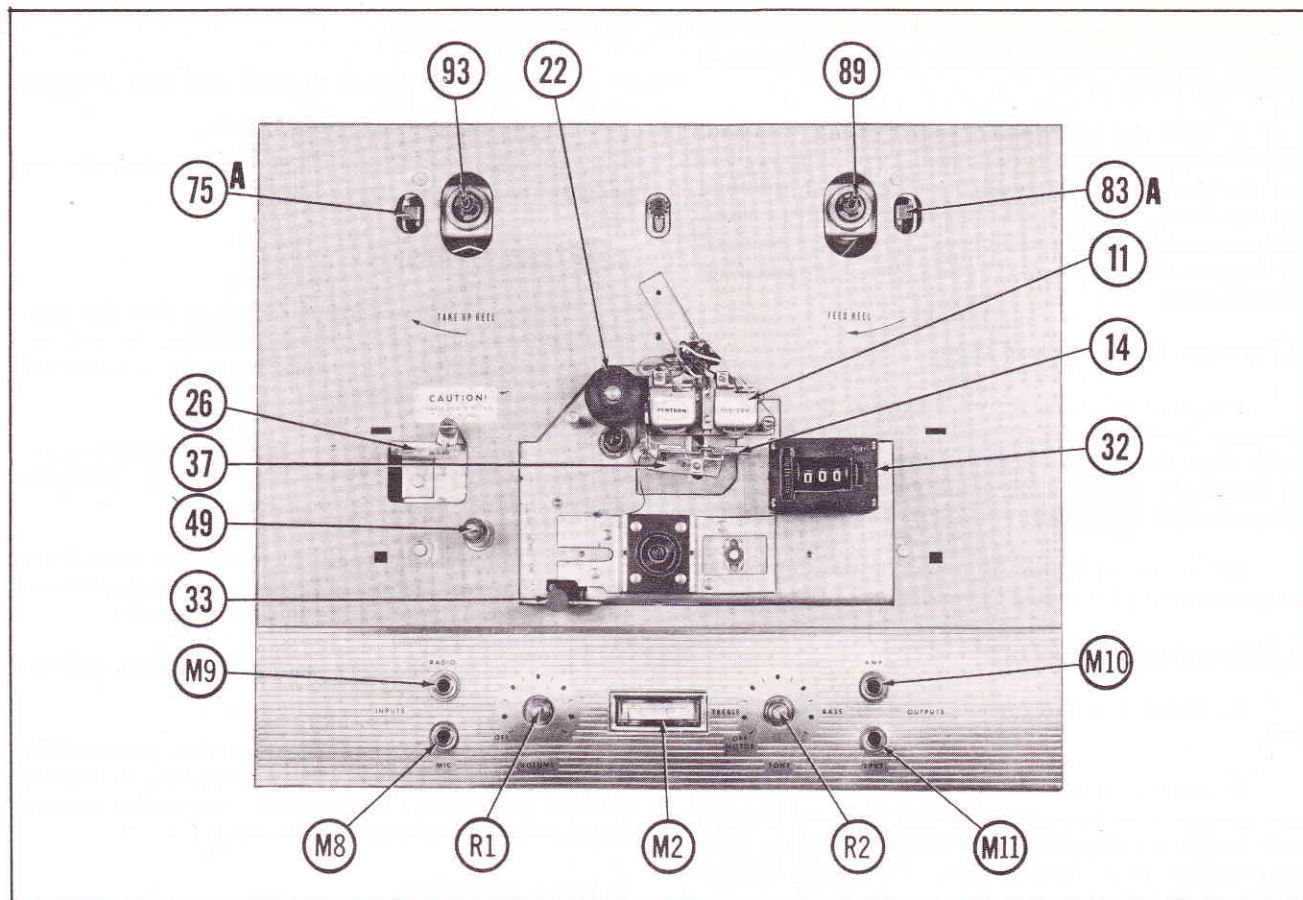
Top View Of NL-3 With Escutcheons Removed.
